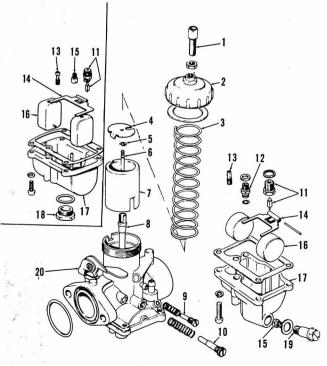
Exploded view of carburetor used on TS 250 R. Inset shows float assembly used on early models.
